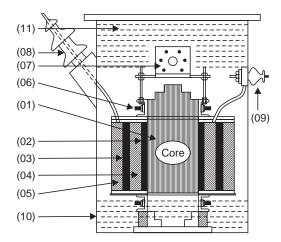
Core-coil assembly placed inside a steel enclosure
